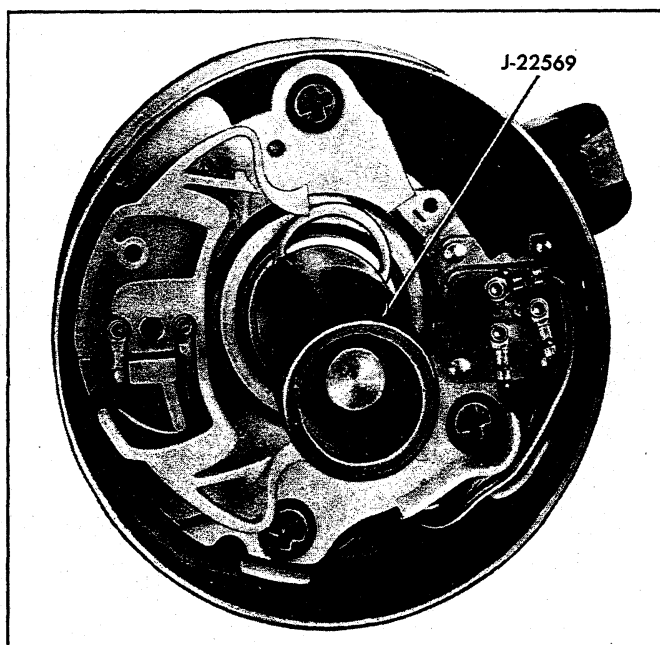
Removing or Installing "C" Ring Retainer Using Tool J-22569
